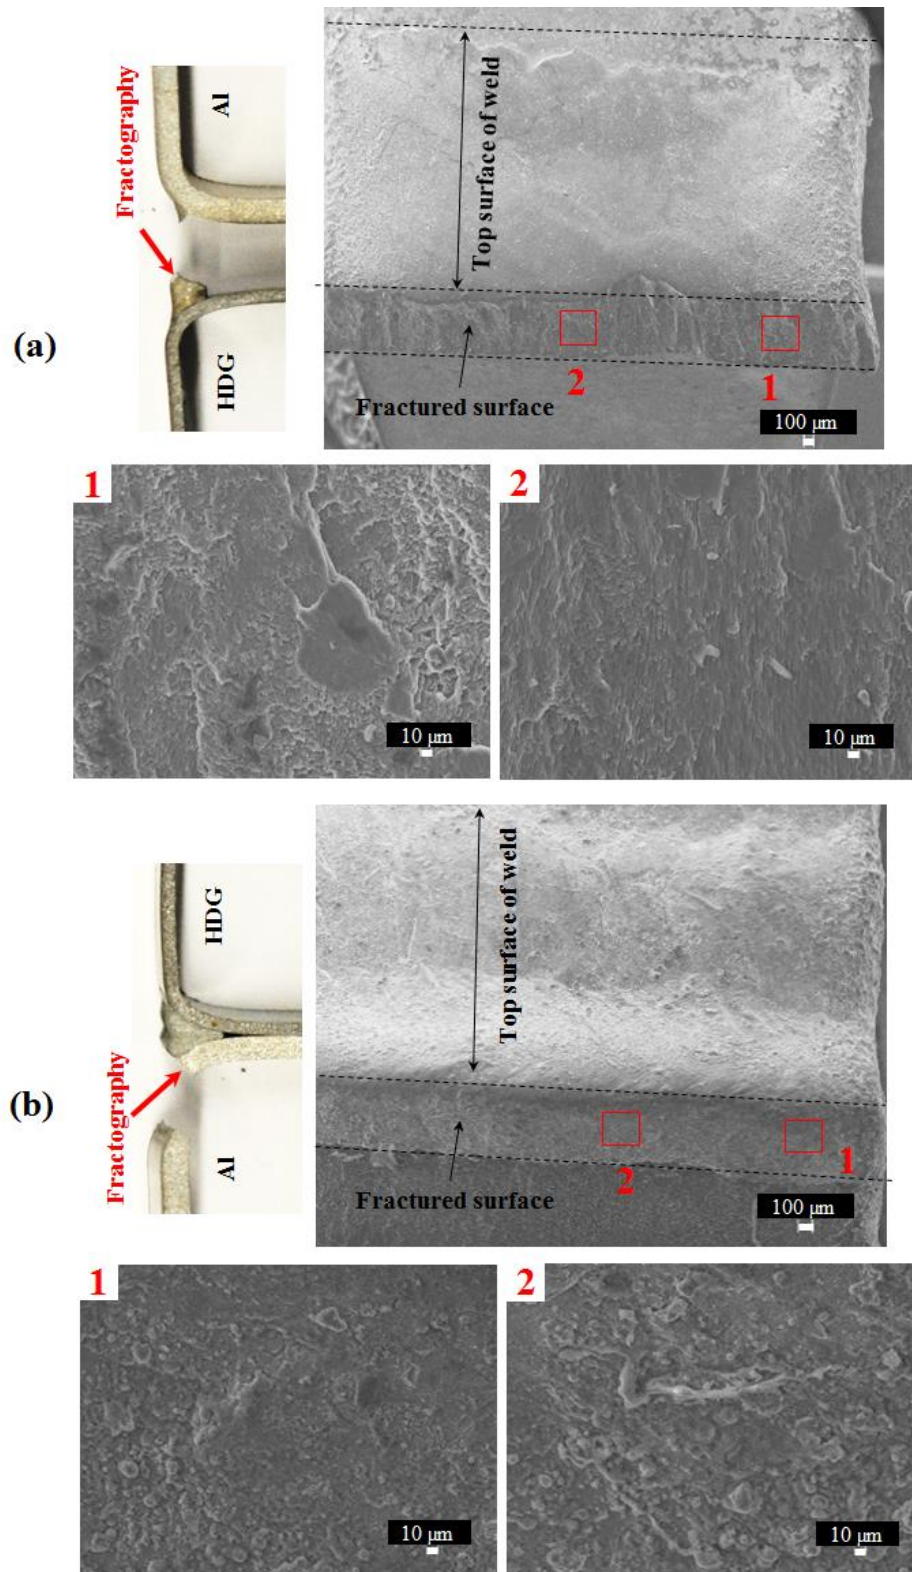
Fractured surfaces of tensile coach peel coupons, note differing fracture modes associated with the different filler wire material: (a) AlSi3Mn1, (b) ZnAl15.
